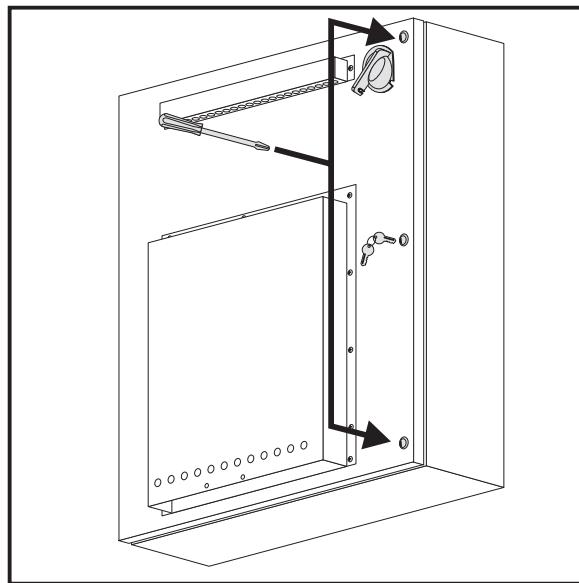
Unscrew the three screws to open the cabinet door. (Newer control cabinets may require a key)
